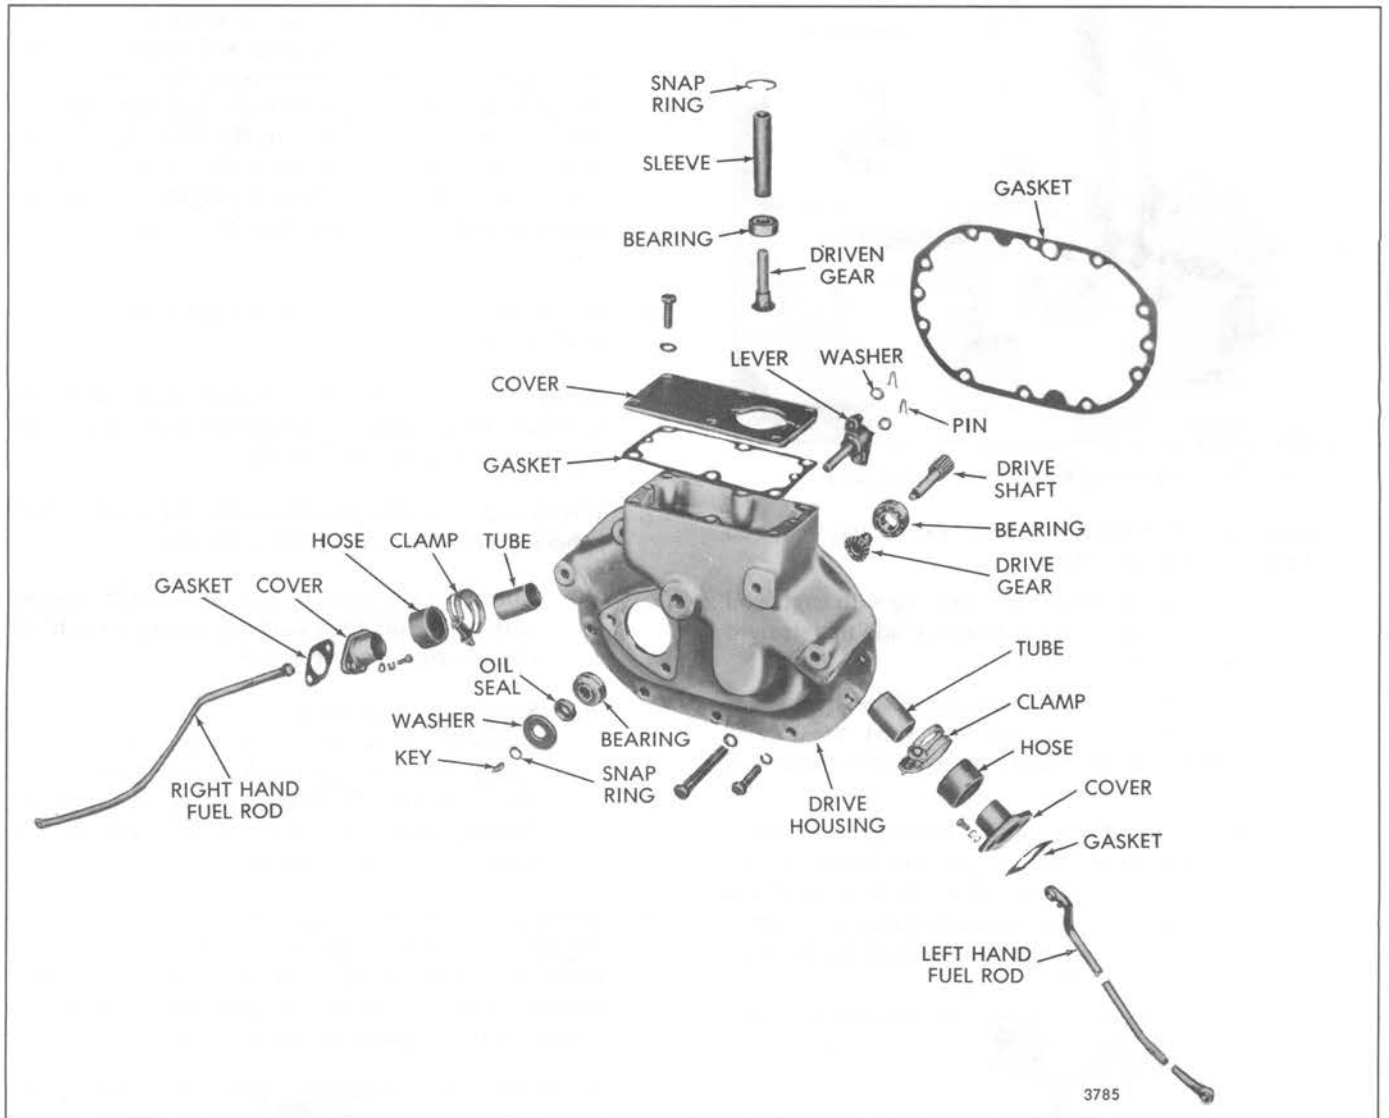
Details of Enclosed Linkage Type Hydraulic Governor Drive and Relative Location of Parts
